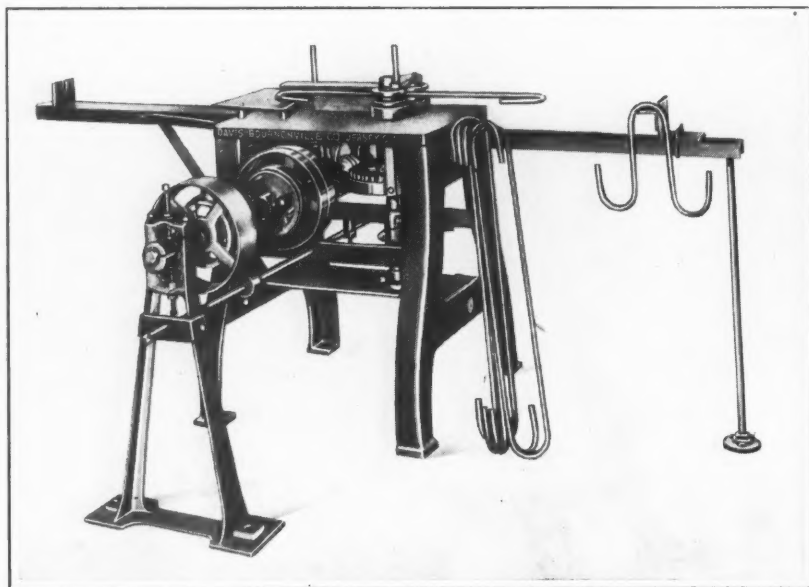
One Style of Tube-bending Machine developed by the Davis-Bournonville Co.
